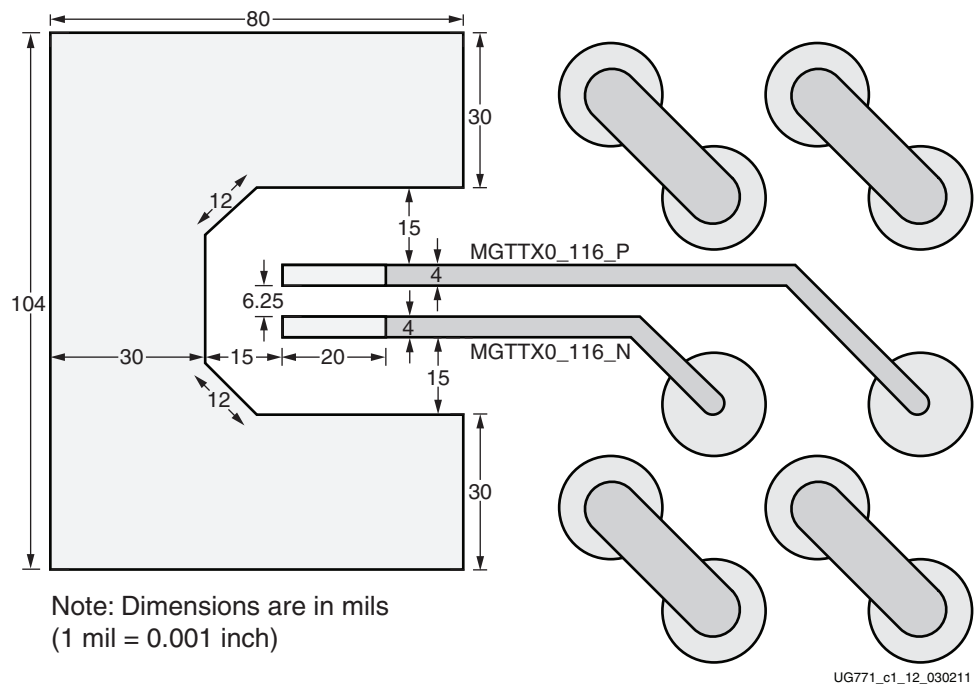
Microprobe Test Pad Dimensions (J180)
